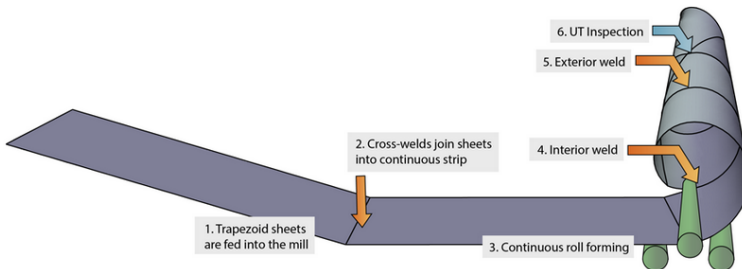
Tapered spiral welding technology for WT towers [118]
